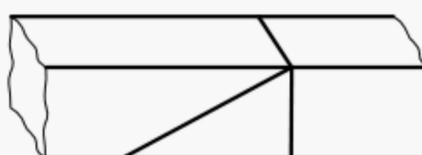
SCARF JOINT (AFTER FORGING)
